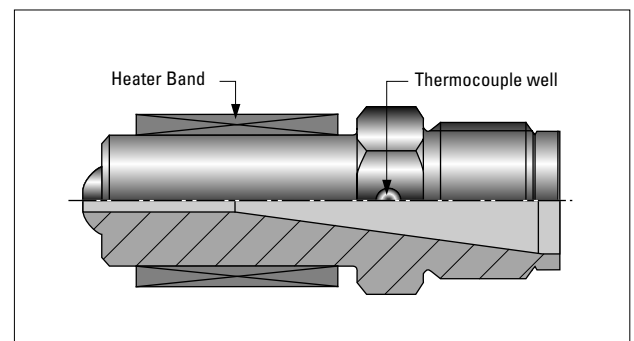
Straight bore nozzle, only for machines without screw decompression
